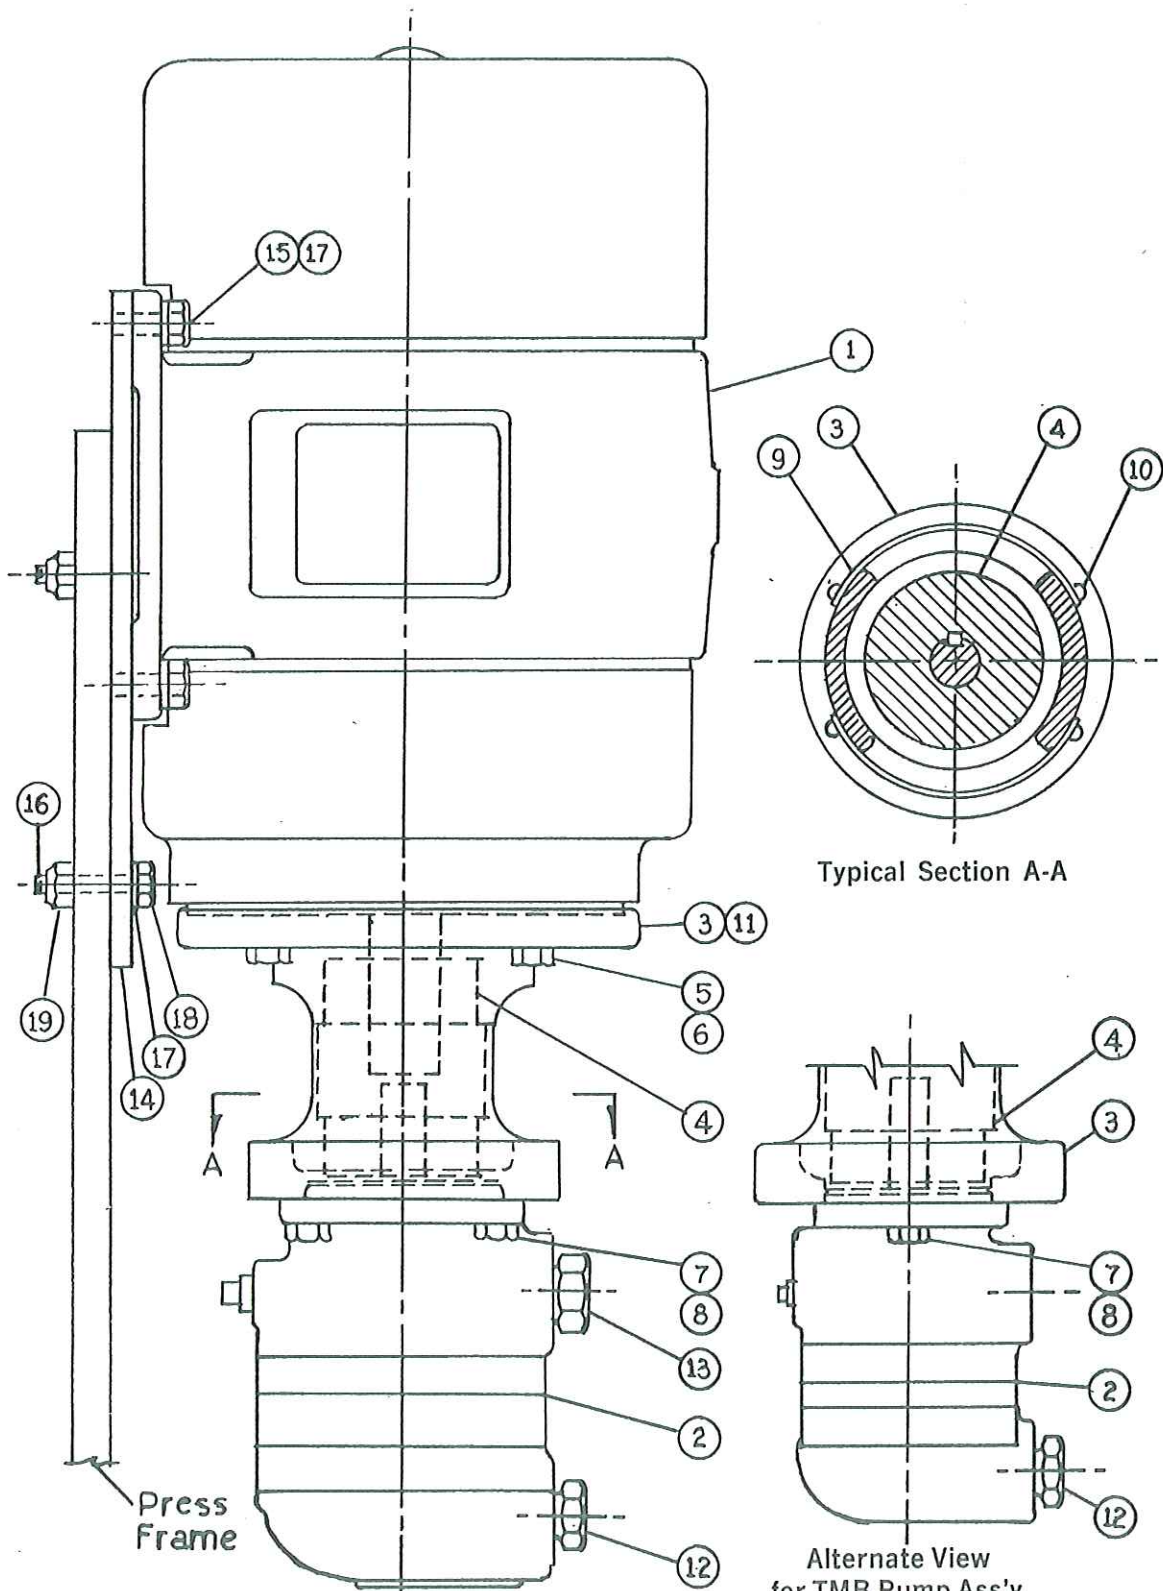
MOTOR & TMC PUMP ASS'Y.
